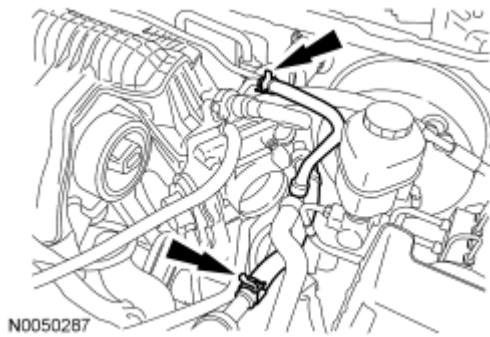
Heater Hose & Positive Crankcase Ventilation (PCV) Coolant Hose
